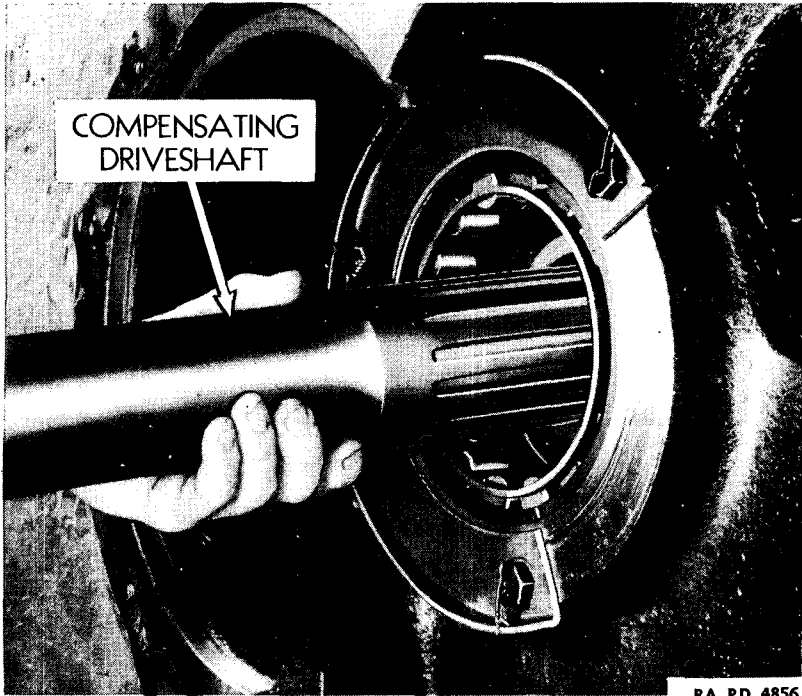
FINAL DRIVE SHAFT AND BEARING
